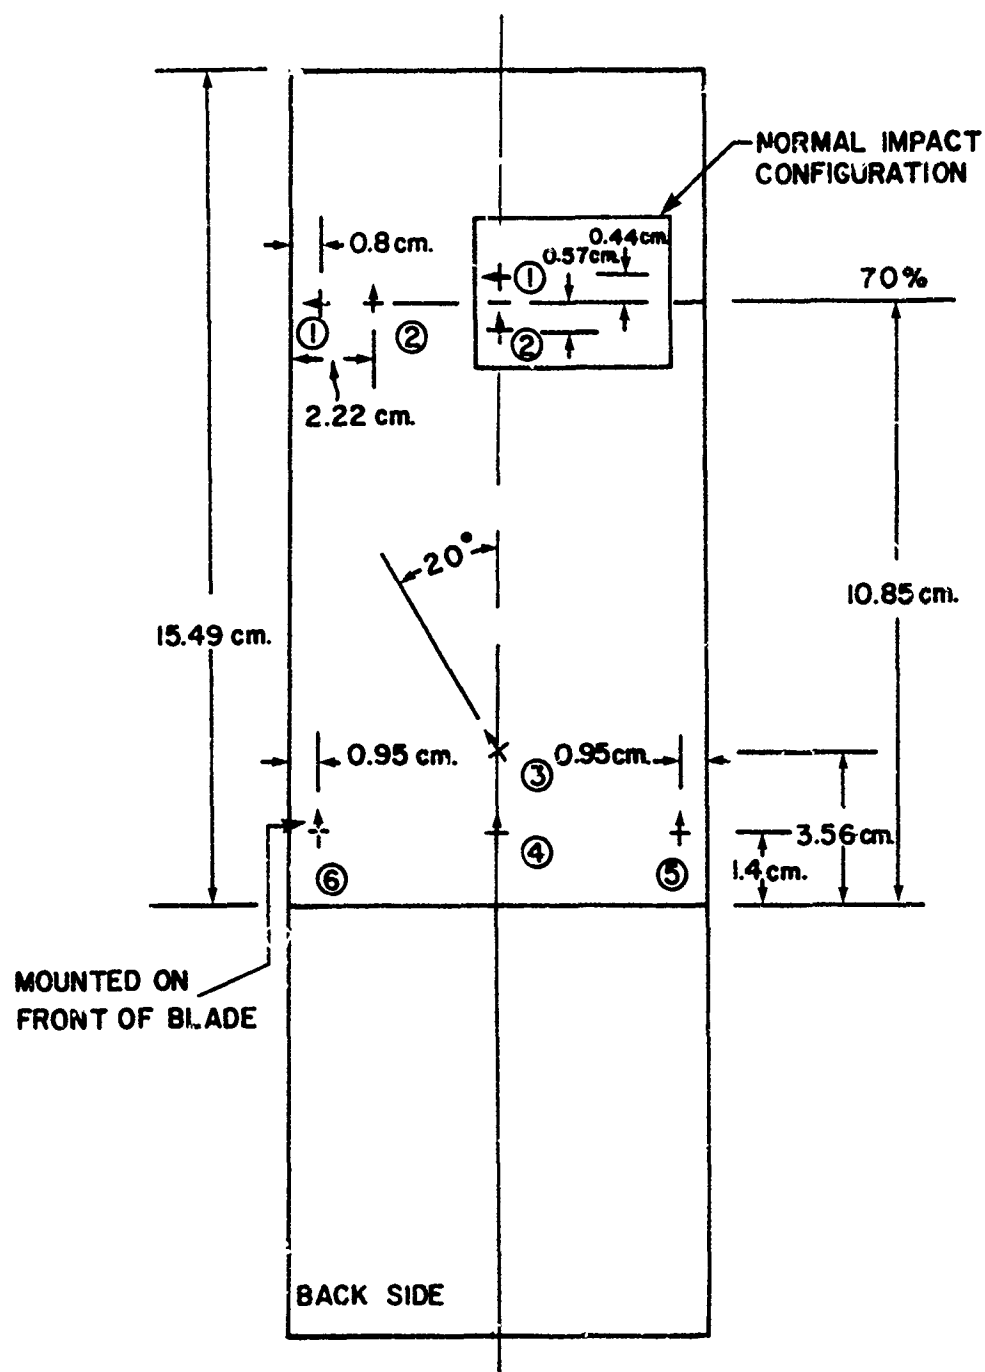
A. Strain Gage Locations for Group 14 and 16 Structural Element Test Specimens.
